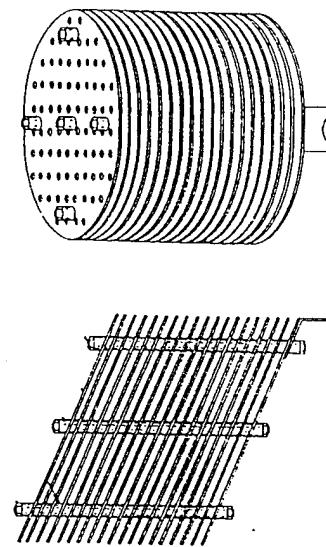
SAREN COALESCING PLATE ASSEMBLY
